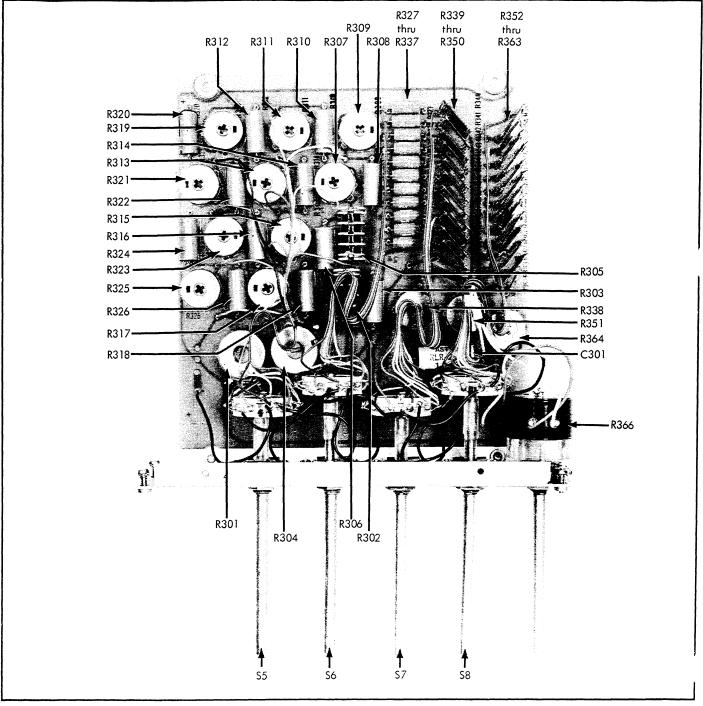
KELVIN-VARLEY ASSEMBLY
